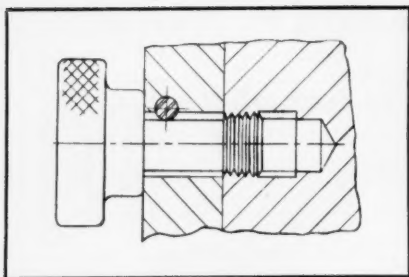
This sketch shows another way of retaining the screw whereby the screw and knob are made integrally and a pin is provided in such a position that the threads on the screw leave the tapped hole before they contact the pin.
